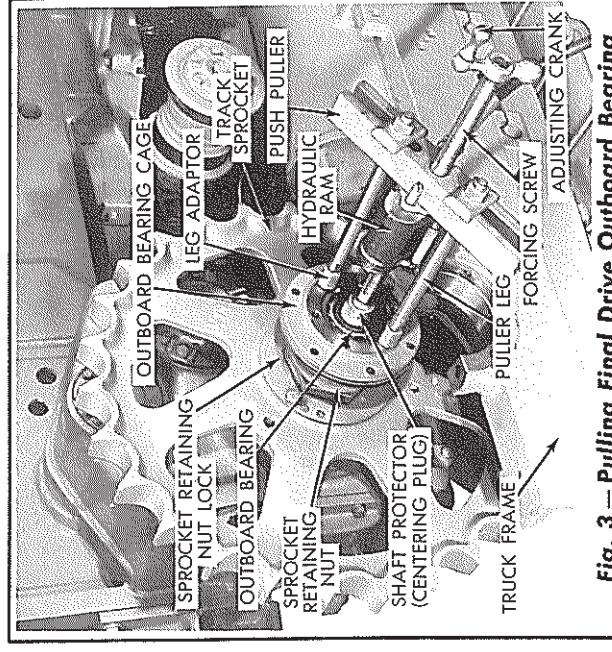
Pulling Final Drive Outboard Bearing from Track Sprocket Shaft
